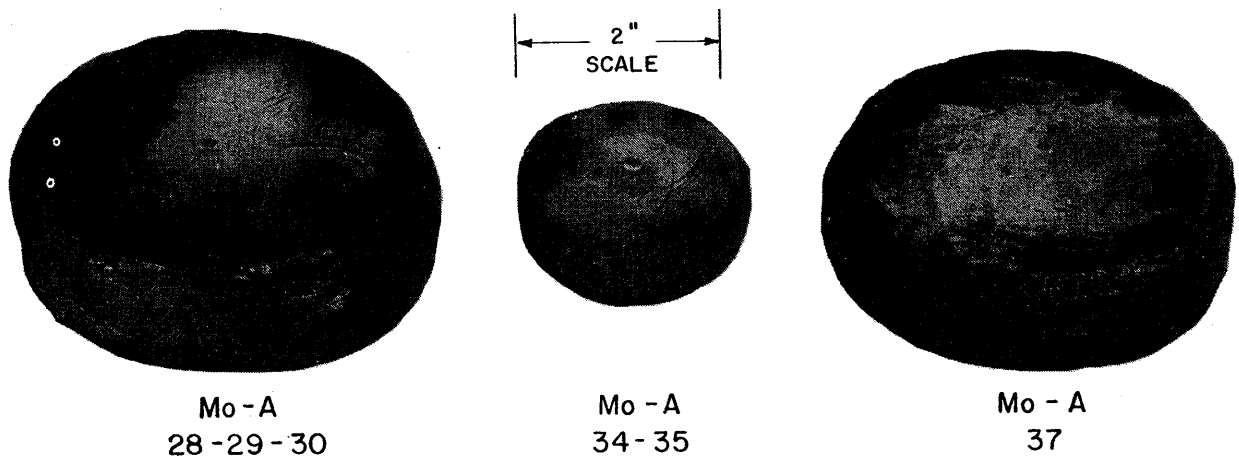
Molybdenum Ingot Sections After Press Forging.
